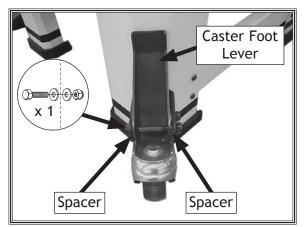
Caster foot lever (1 of 3) installed on front right support bracket.
